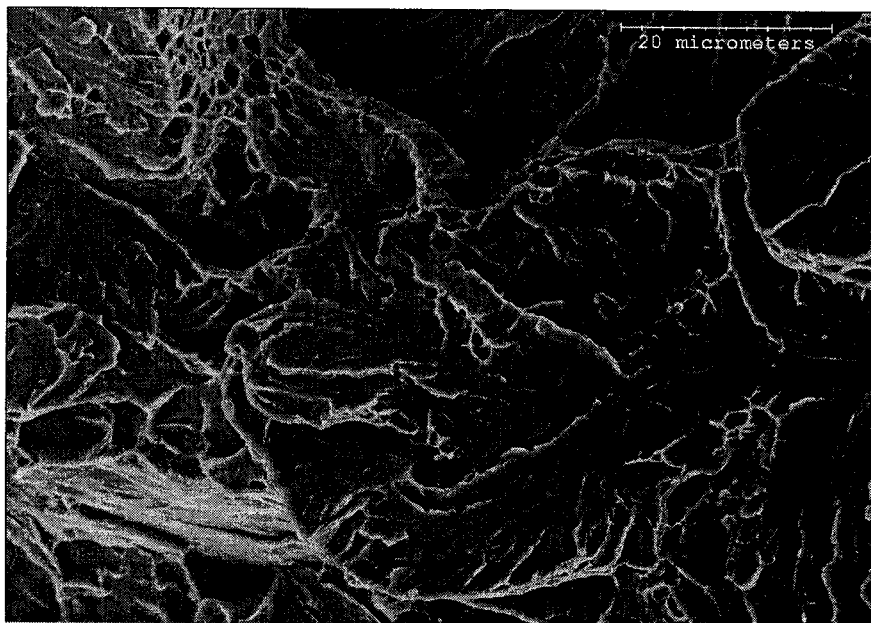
Fracture Surface of Test Specimen T28-1
